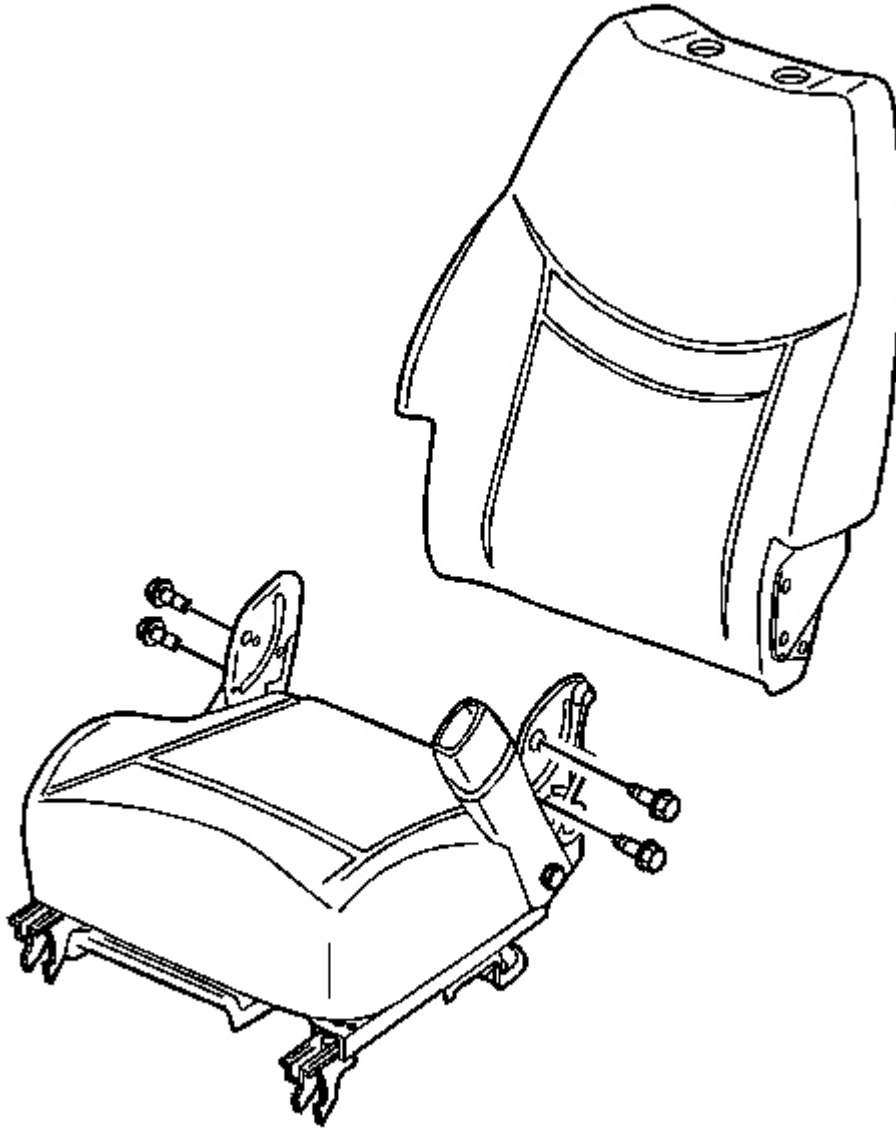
Removing/Installing Bolts & Seat Back Assembly
